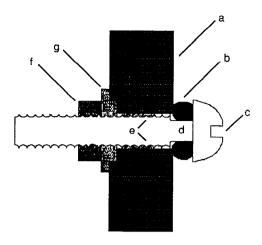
Vacuum seal for each button: (a) aluminum vacuum flange, (b) viton O-ring, (c) stainless-steel screw-head facing plasma, (d) portion of screw lathed down to accommodate O-ring, (e) heat shrink tubing, (f) brass nut, (g) nylon shoulder washer.
